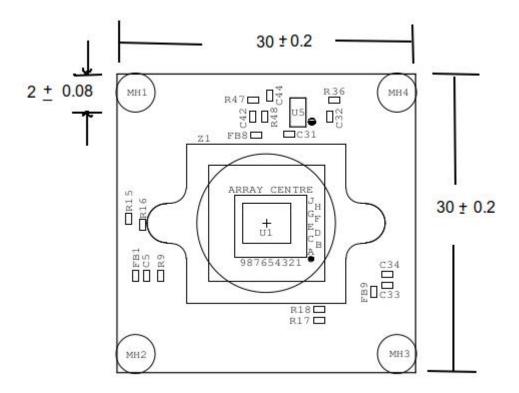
Front Portion of e-CAM222_CUMI_MOD Board Mechanical Dimensions
